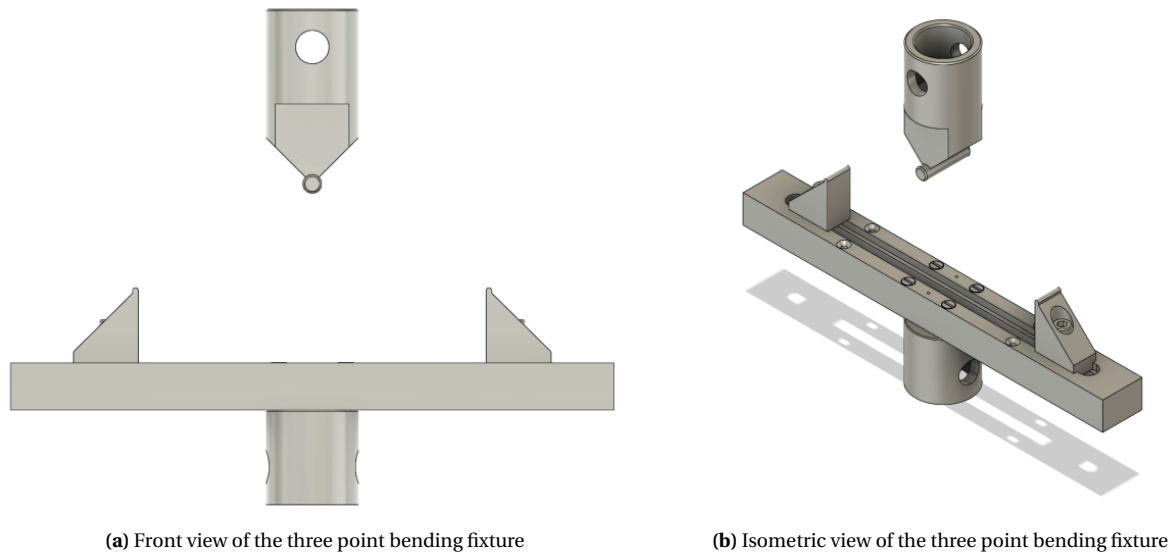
Three point bending fixture used as experimental MBB set-up, fixture uses roller sizes that can be changed and the distance between the bottom rollers can be adjusted.
